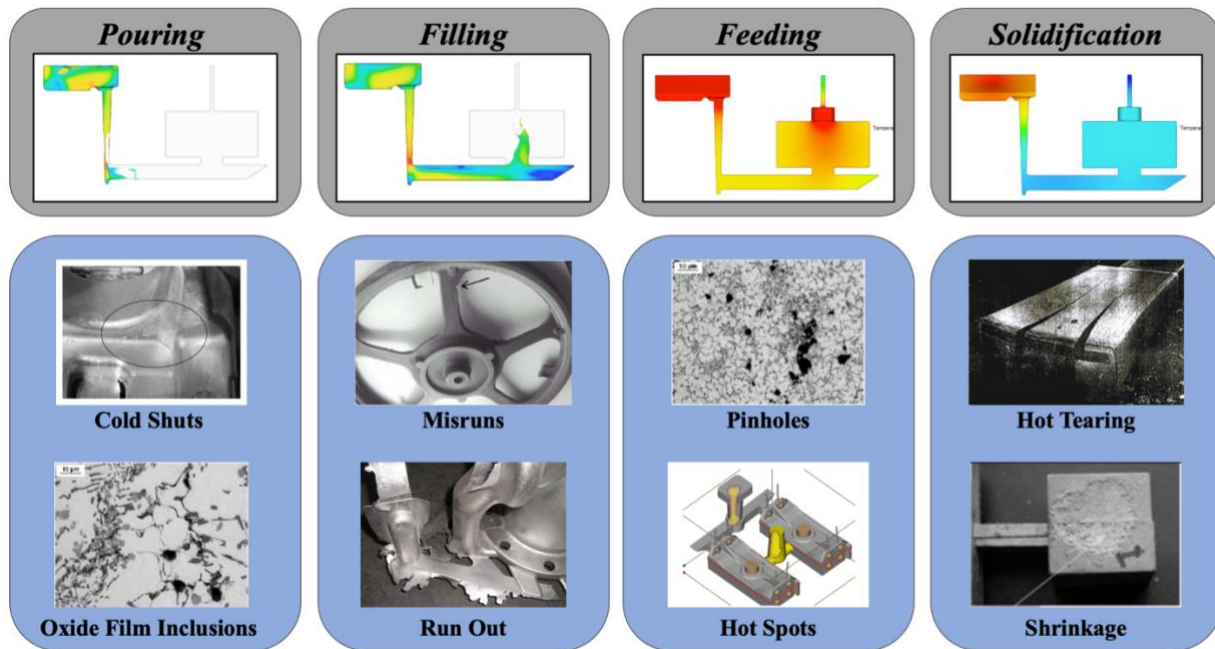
Common casting defects occurring in each stage of the casting process, such as Cold Shuts¹, Oxide Film Inclusions², Misruns³, Run Out⁴, Pinholes², Hot Spots⁵, Hot Tearing³, and Shrinkage⁶
